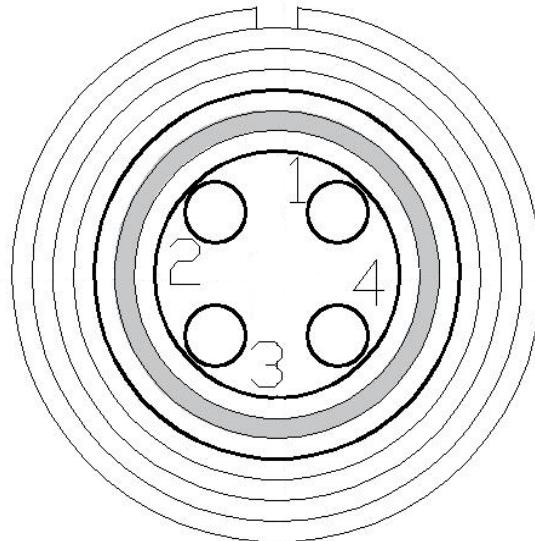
Inverter Box CN4 Connector Layout Drawing
